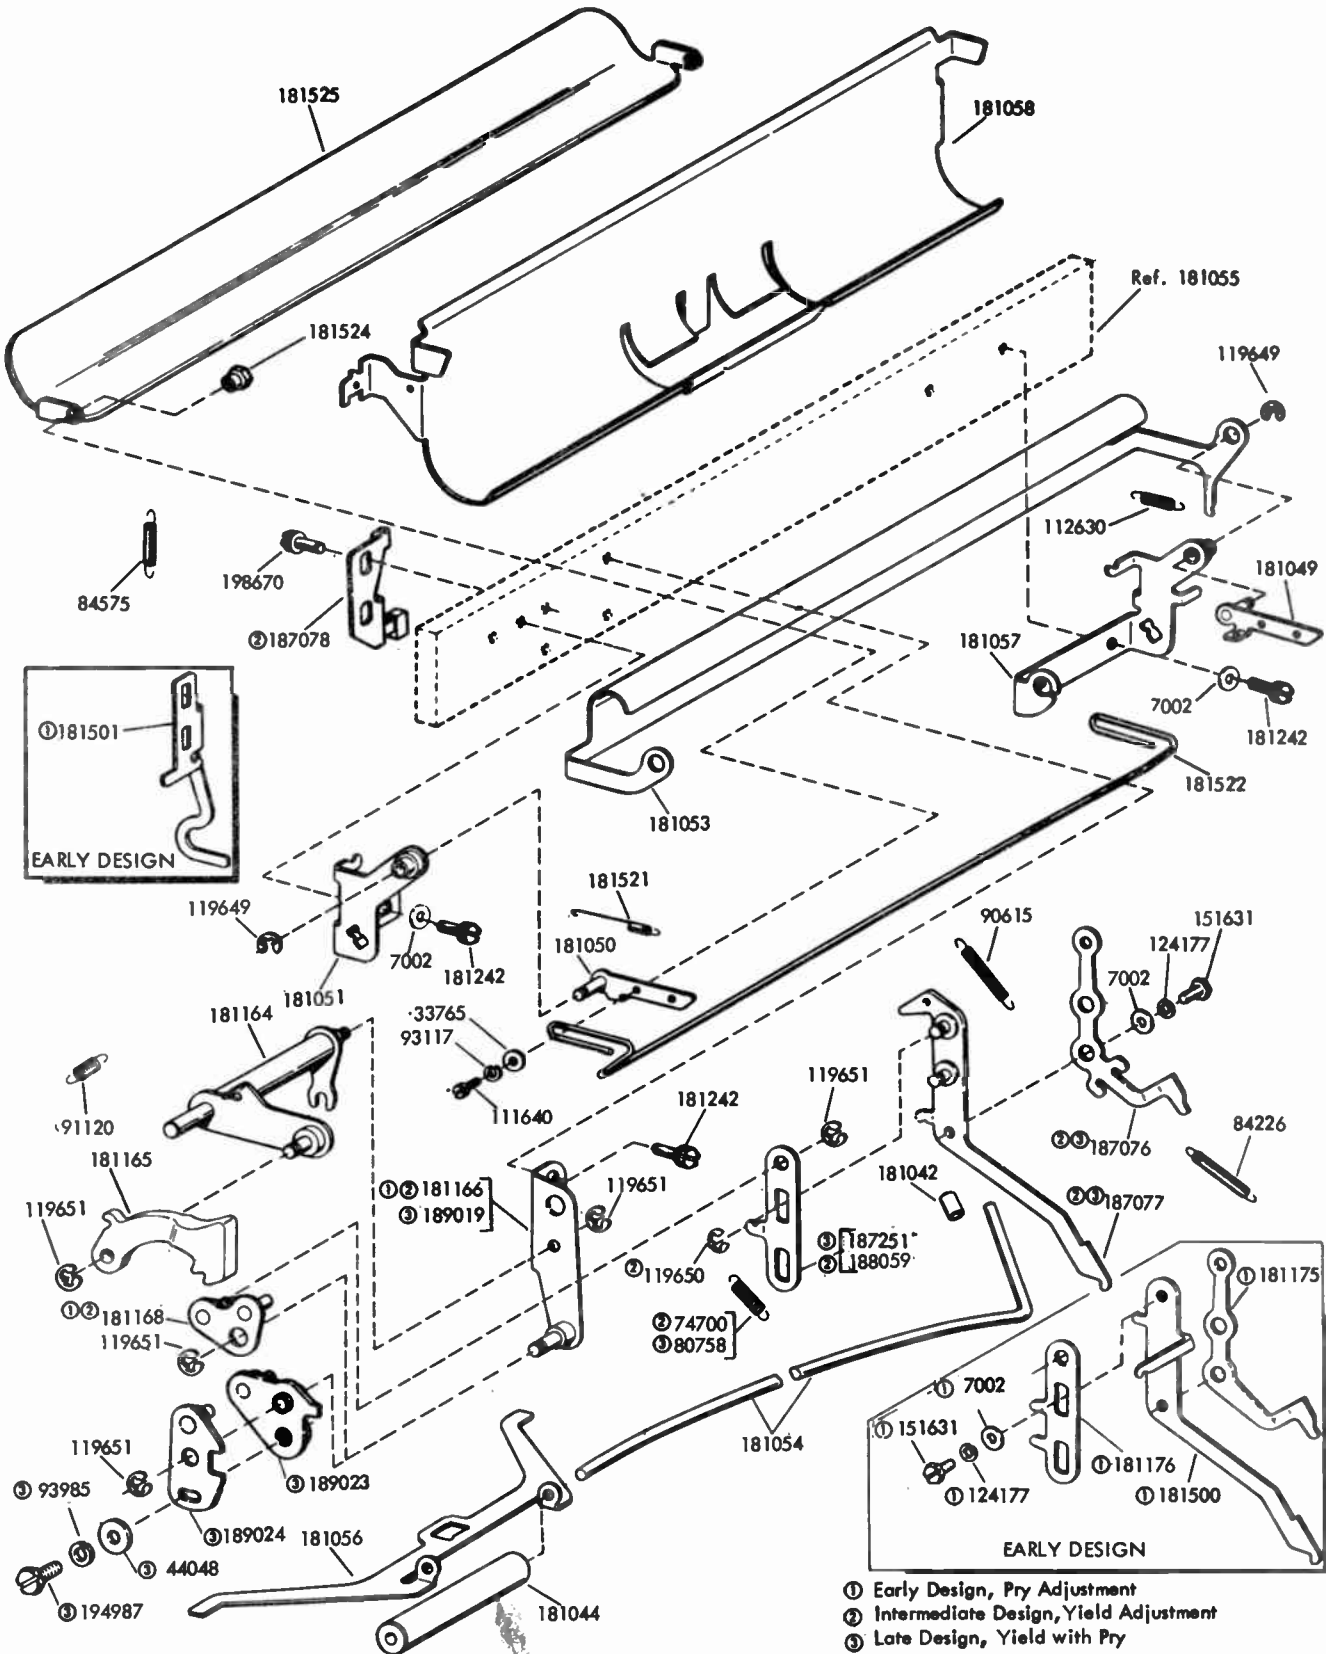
PAPER HANDLING MECHANISM - FRICTION FEED
